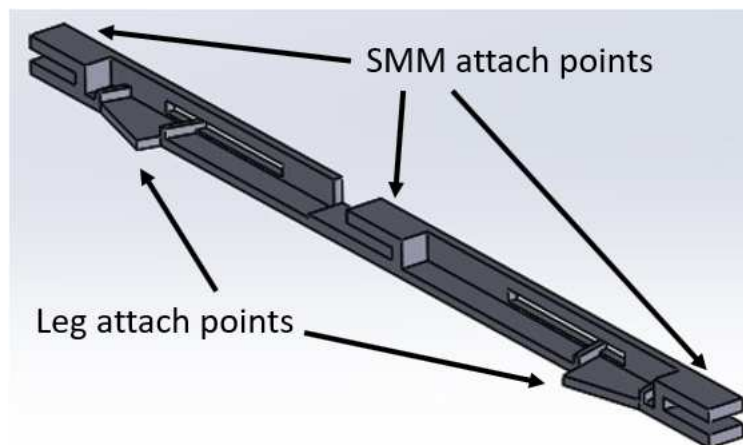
CAD model of one of the symmetrical body clips that hold the SMM and legs into position.
